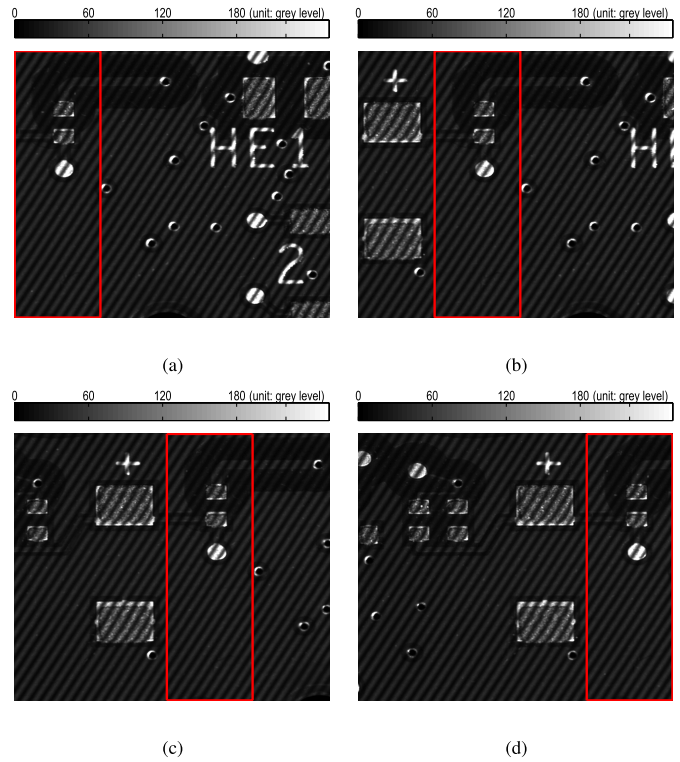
(a)–(d) Four sequential fringe pattern images of the PCB when it is moving across the INSPECT system. With these images, the surface of the solder paste and the PCB within their common physical region, marked in red, can be reconstructed.
